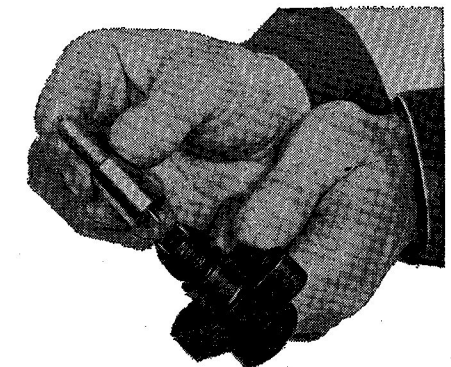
When positioning nozzle and needle on body be sure that body dowel pins are correctly aligned in nozzle.
